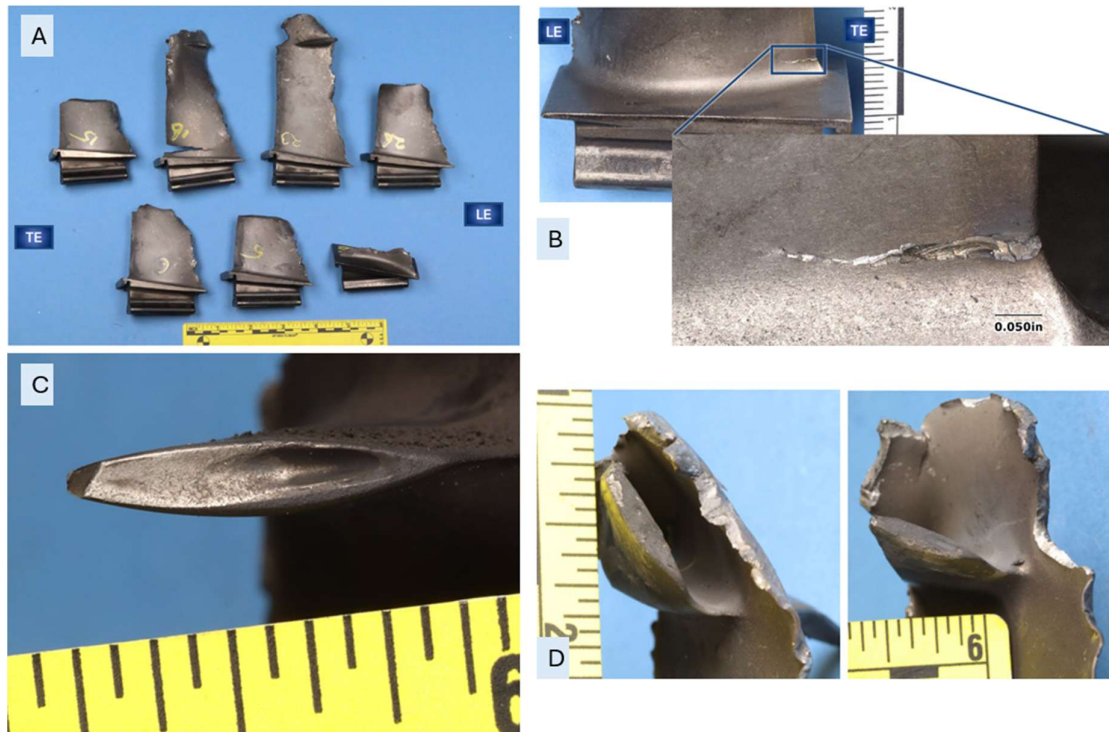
A- Closer view of 7 blades showing representative damage signatures. B- Trailing edge crack on blade 5. C - Fretting contact on the clapper end face on the convex side of 31st blade. D- End faces of clappers on the convex sides of 21st blades (left image) and 23 (right image) showing surfaces covered with black deposits.
